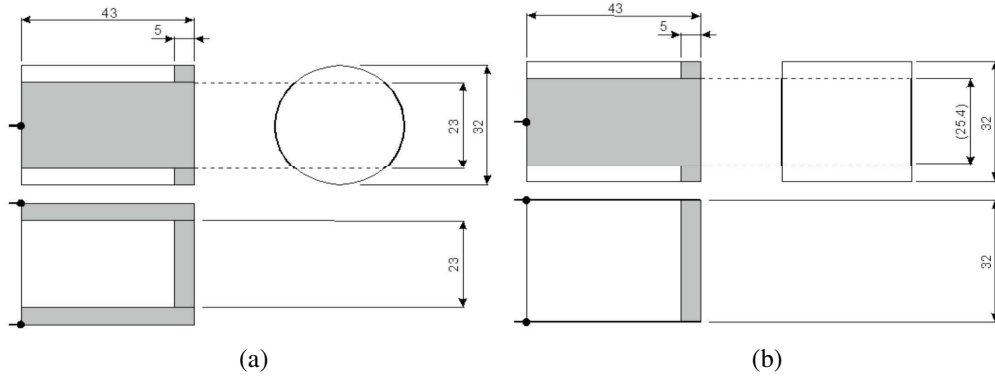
(a) Cylinder strip coil lay-out. (b) Square strip coil lay-out.
